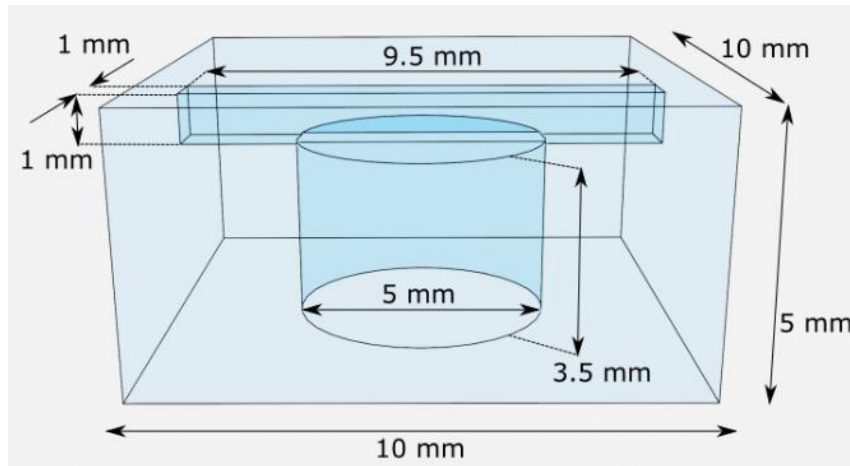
Laser-Written Vapor Cell manufactured using the FLICE technique. It consists of a cylindrical reservoir (5 mm diameter, 3.5 mm height) connected to a rectangular parallelepiped sensing channel (1×1 mm cross-section, 9.5 mm length). From [14]
